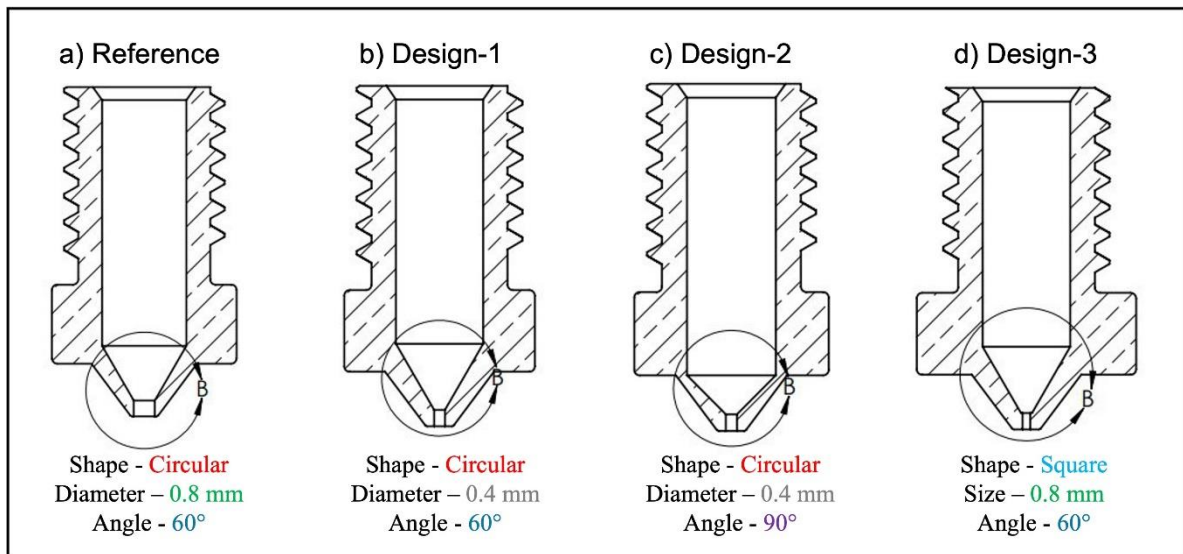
Technical drawing of nozzle designs. a) Reference, b) Design-1, c) Design-2, d) Design-3.
